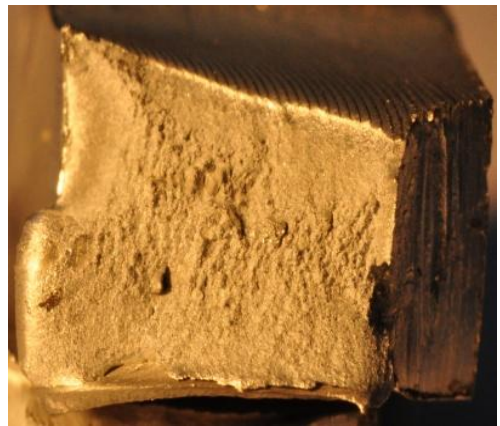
₂. Macrophoto. fracture (700rpm,150mm/min)
